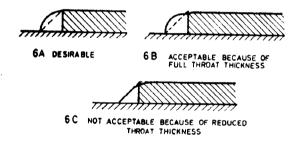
FULL SIZE FILLET WELD APPLIED TO THE EDGE OF A PLATE OR SECTION
